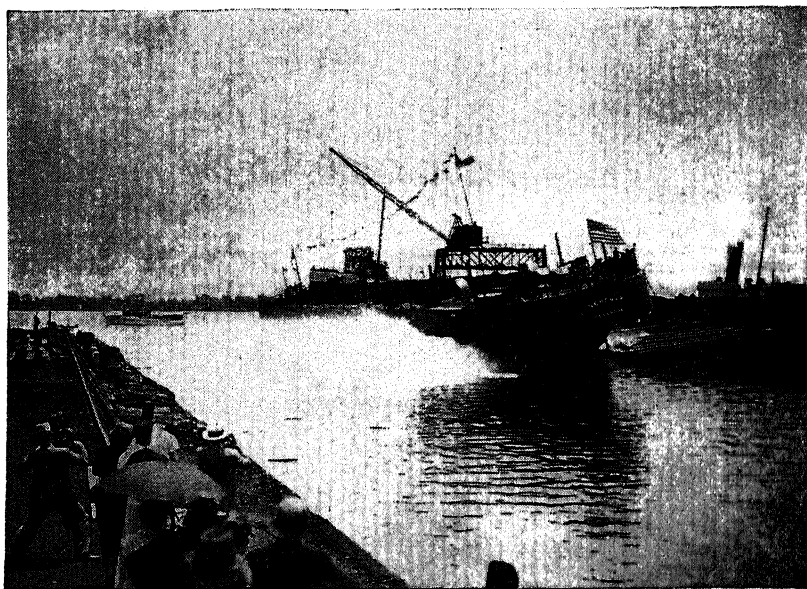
300-ft. all welded freighter being launched. Welded steel construction made possible 300 tons extra cargo carrying capacity.
